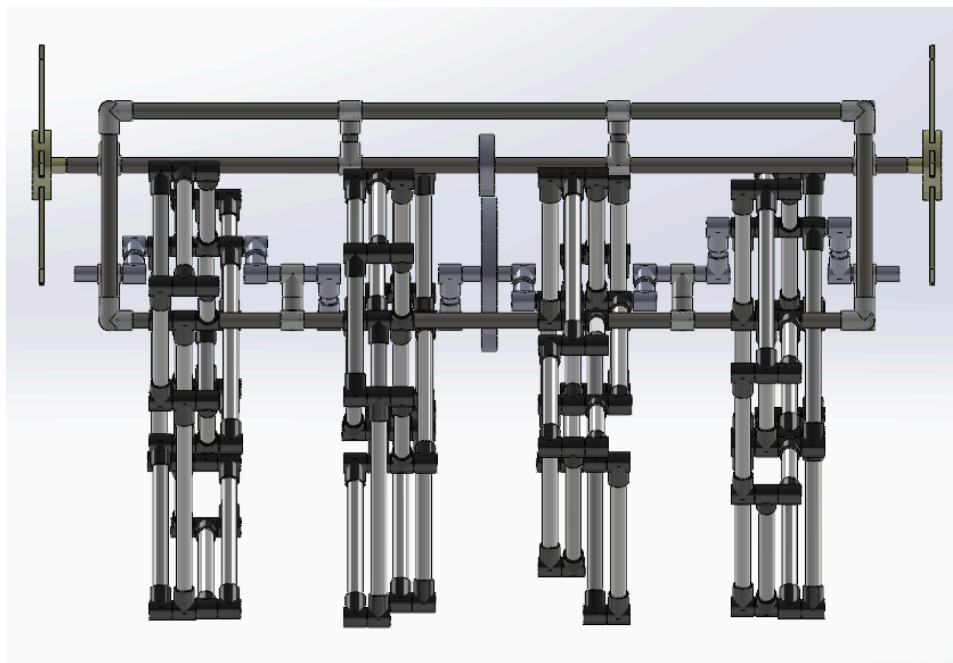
Solidworks Full Assembly Model (Front-Plane View)
